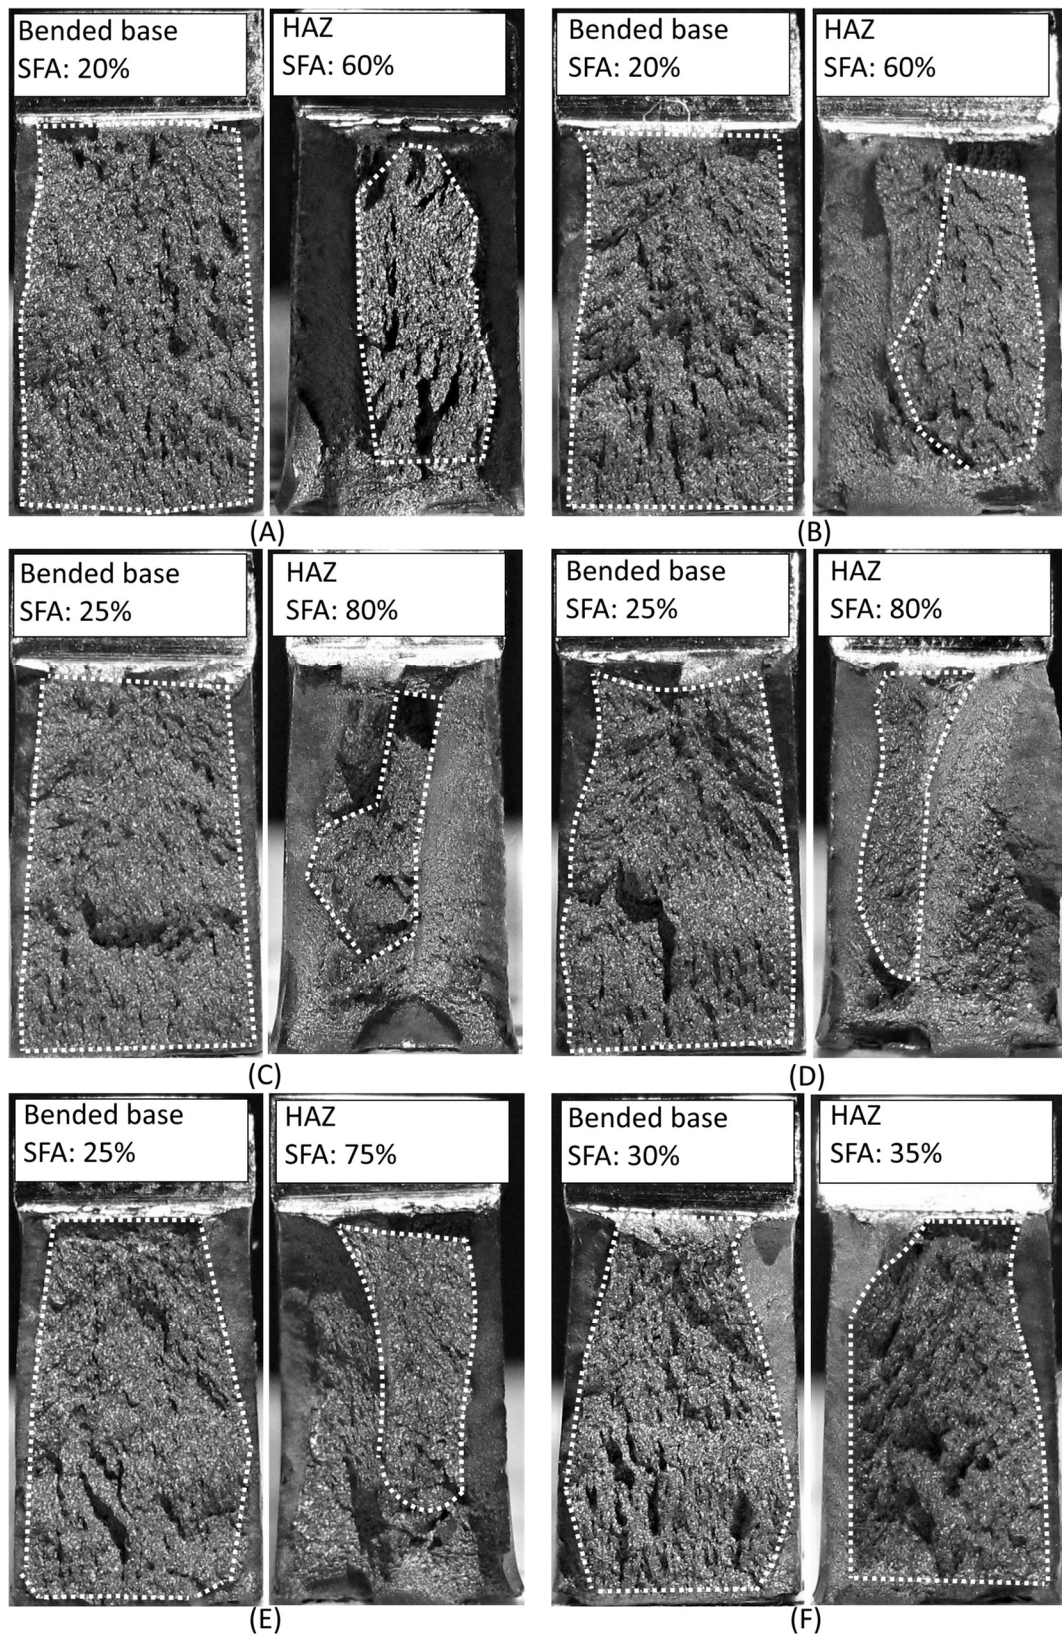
Fracture surfaces and SFAs for the bended sides of the joints: (A) $r = 20$ mm, (B) $r = 24$ mm, (C) $r = 28$ mm, (D) $r = 30$ mm, (E) $r = 37$ mm, (F) $r = 40$ mm. Brittle fracture areas are indicated by white dashed lines.
